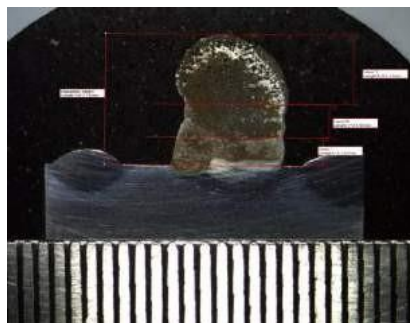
Different samples of welding and layers of welding process
